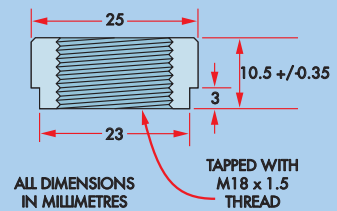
this diagram shows the dimensions of the threaded boss that's used to attach the sensor. It must be made of stainless steel and should cover the sensor's thread completely.
